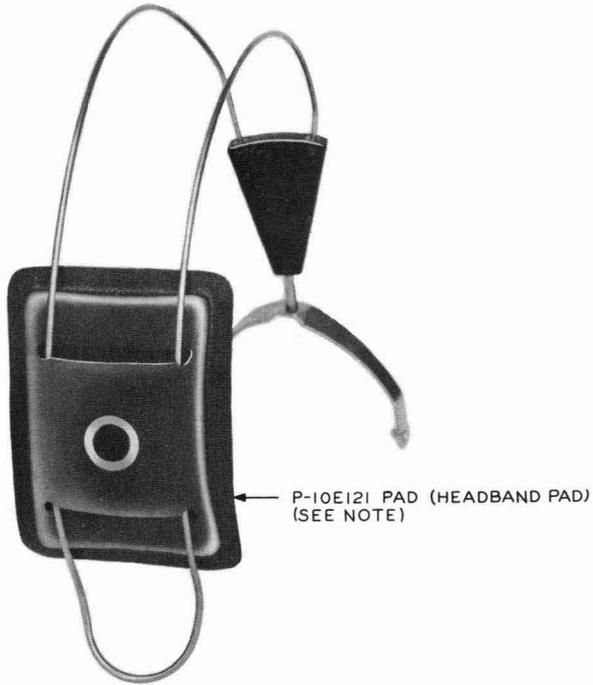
Handle and Transmitter Arm Assembly With Receiver and Transmitter Units Removed—No. 53A, 53C, 53AR, 53DR, 53ER, and 53GR Head Telephone Sets
